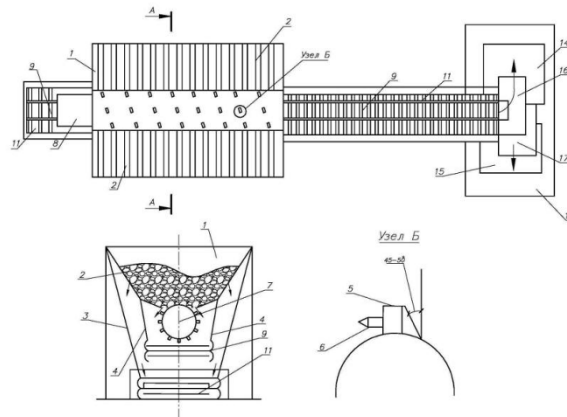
grinding-sorting complex (top view, section a-a, node b)
